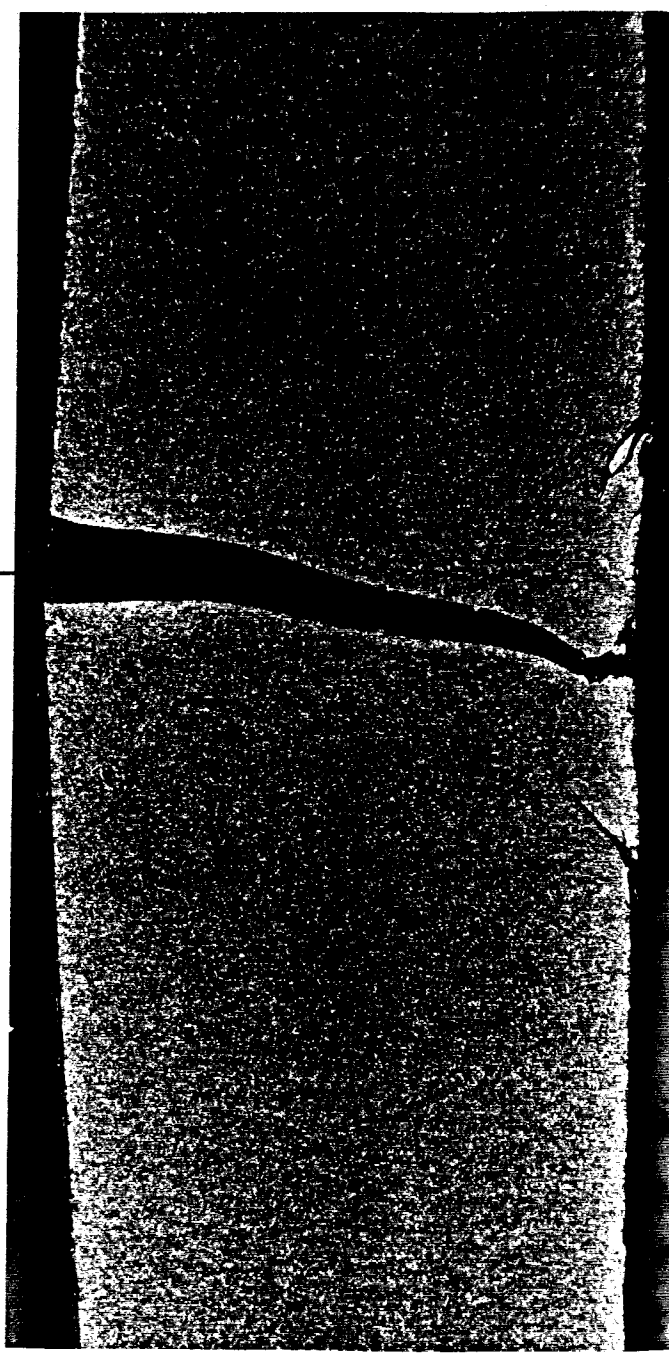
A COLD WELD IN HF ERW PIPE
